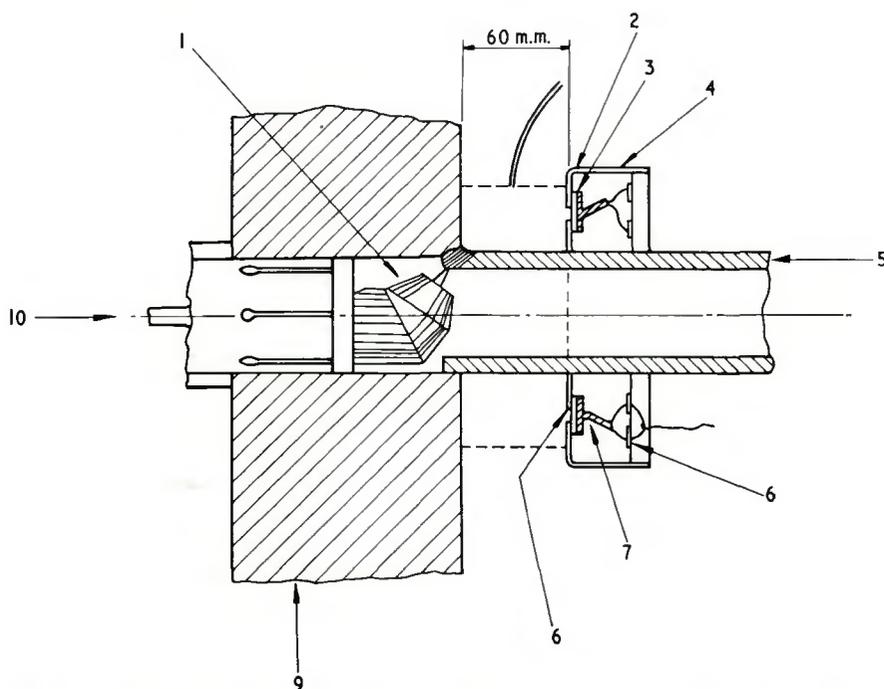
Components of the system for welding a tube/tubesheet assembly; 1-Welding head; 2-heat filter; 3-green filter; 4-metal box; 5-tube; 6-PCB connectors; 7-diode; 8-6 mm window; 9-tubesheet; 10-stepping motor drive (Ref. 25)
